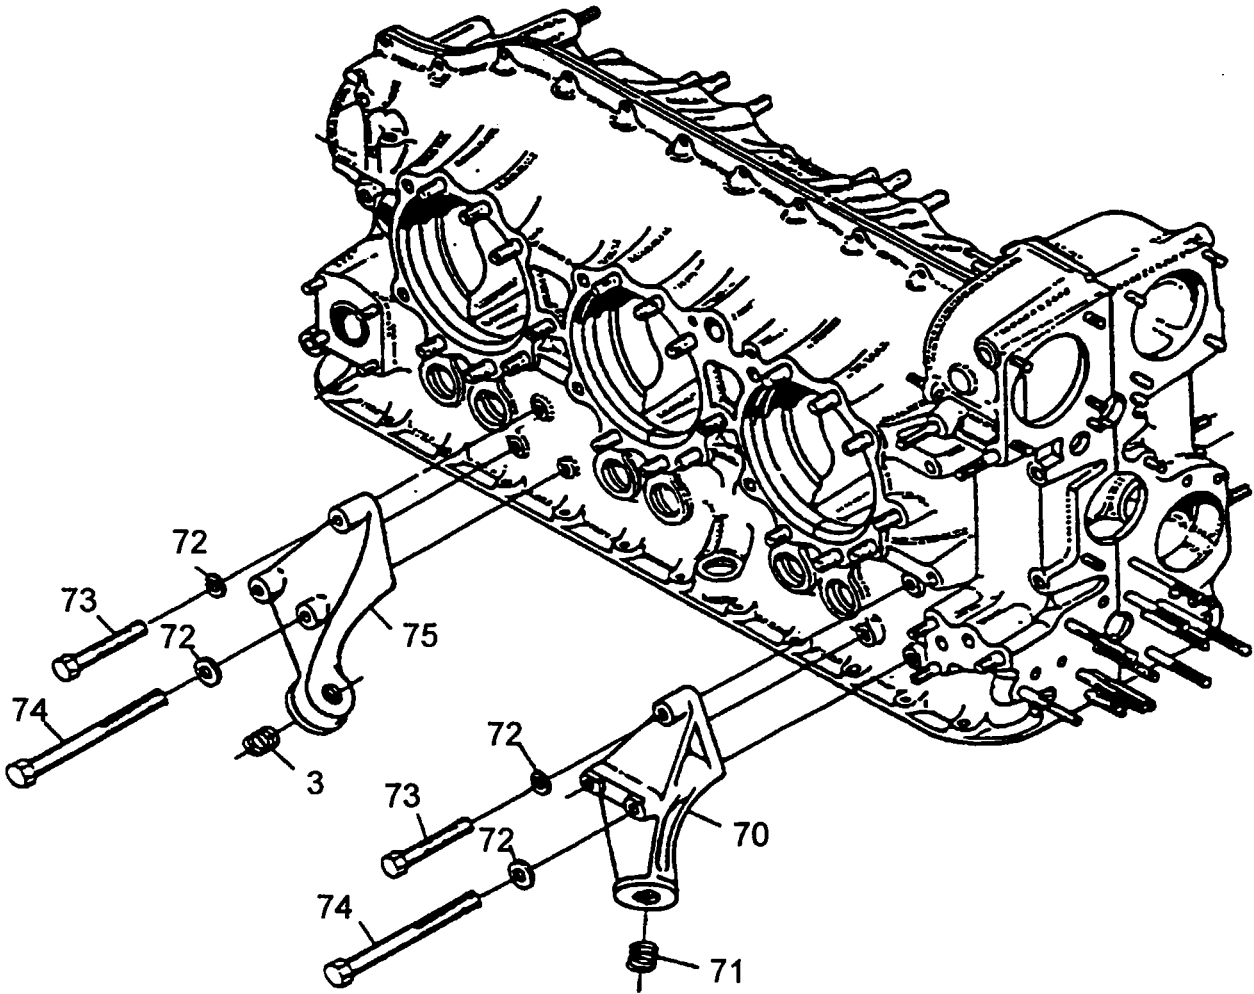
CRANKCASE WITH OIL FILLER
